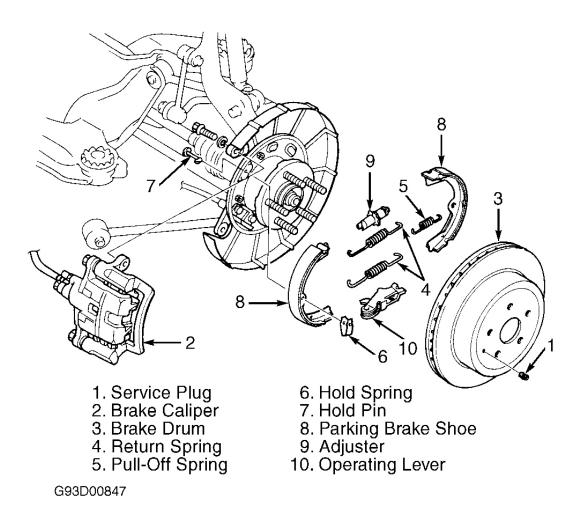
Exploded View Of Parking Brake Assembly (Millenia, MPV & 929) Courtesy of MAZDA MOTORS CORP.
